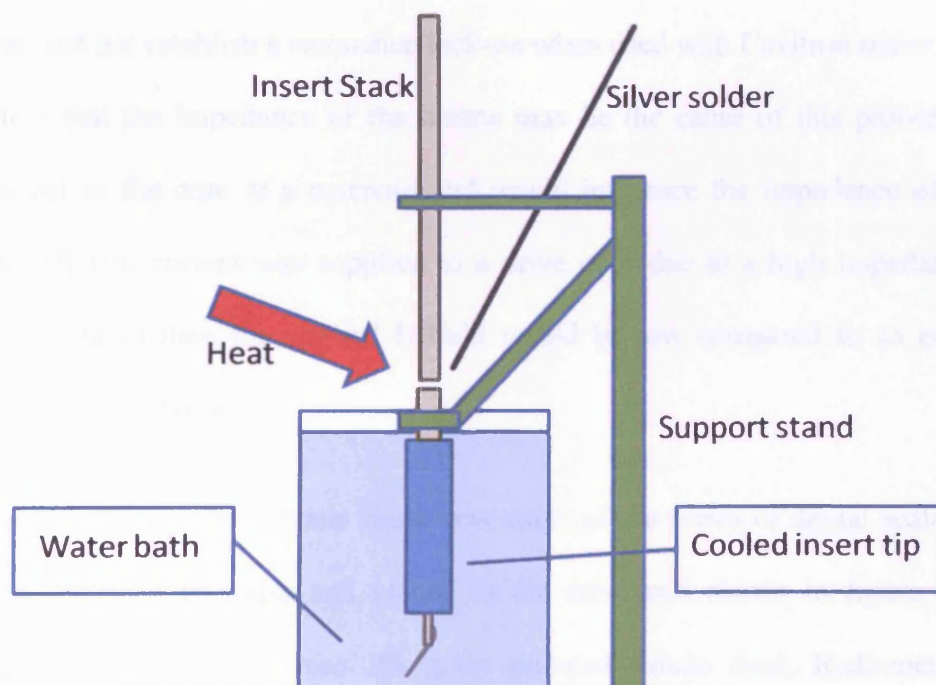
Soldering of commercial insert tip assemblies to new insert stacks using a water bath to protect plastic components from thermal damage during heating.
